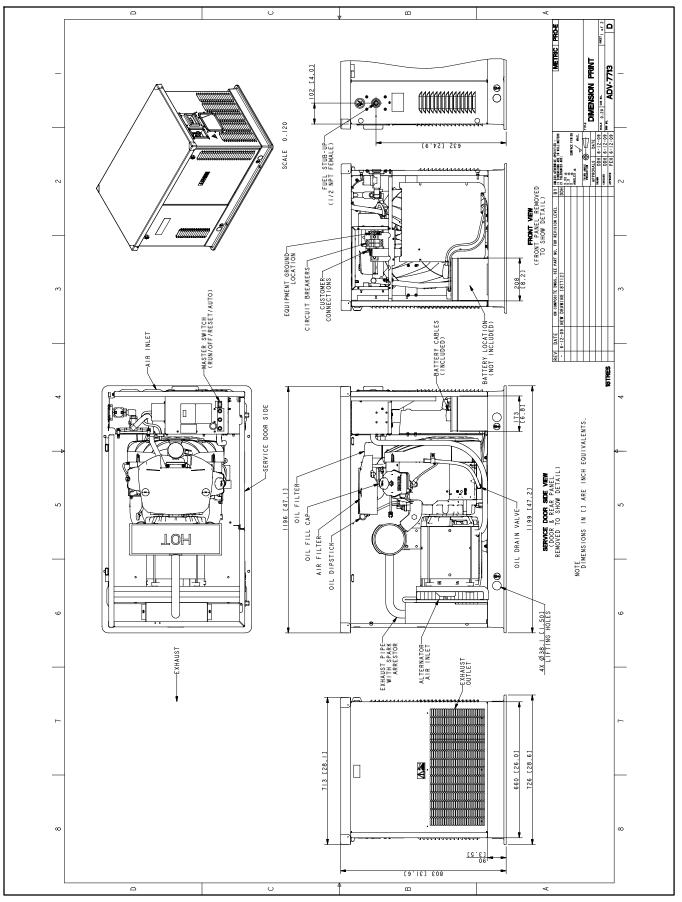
Generator Set Mounting Details and Dimensions, 18TRES (3-phase), ADV-7713, Sheet 1
